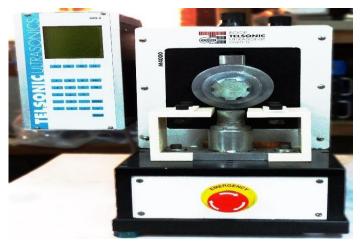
Telsonic M4000 Ultrasonic Metal Welder
